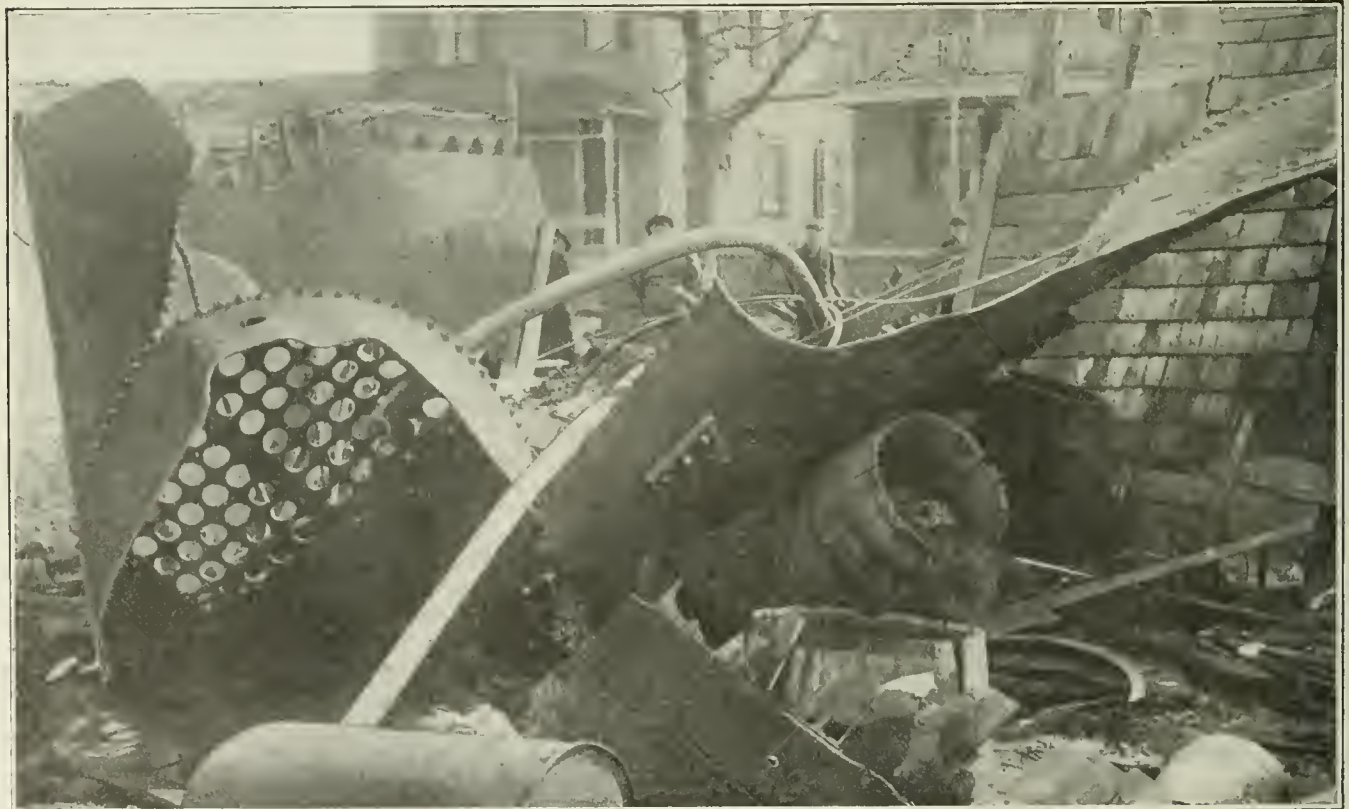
FRONT TUBE SHEET AND FIRST TWO SHELL SHEETS
